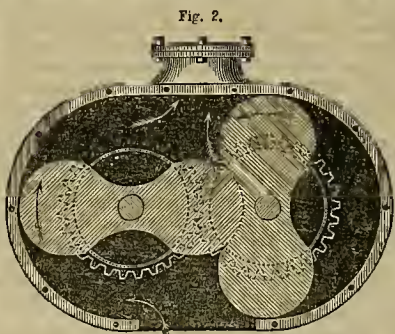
exhibits a peculiar mechanism of pump machinery, which is moved by a double cog-wheel and spring. A reciprocating action is imparted, which secures a continuous stream and easy action.
